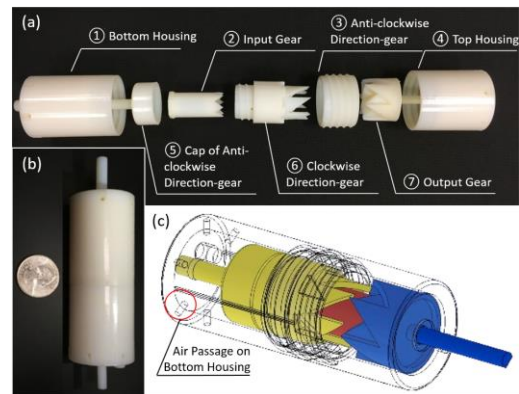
(a) Exploded component view, (b) dimension and (c) CAD model of the stepper motor.
